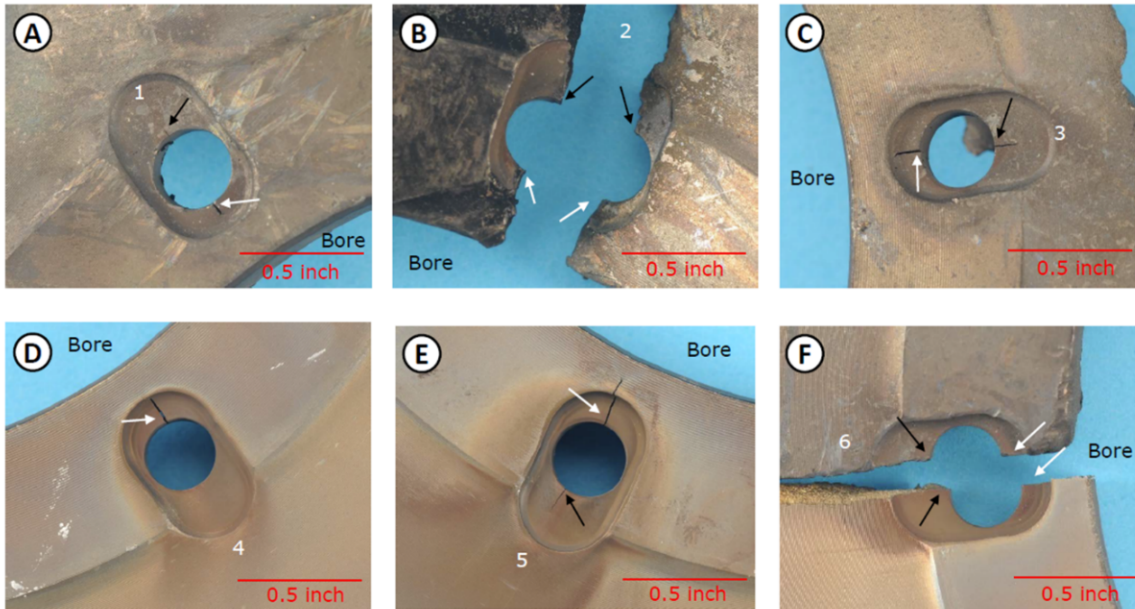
First stage sealing disk showing the six cooling holes, each with cracks formed. Photo courtesy of Honeywell Aerospace.
